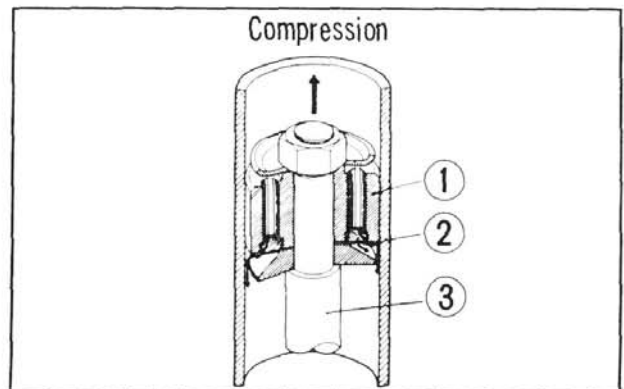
① Piston ② Valve ③ Rod
